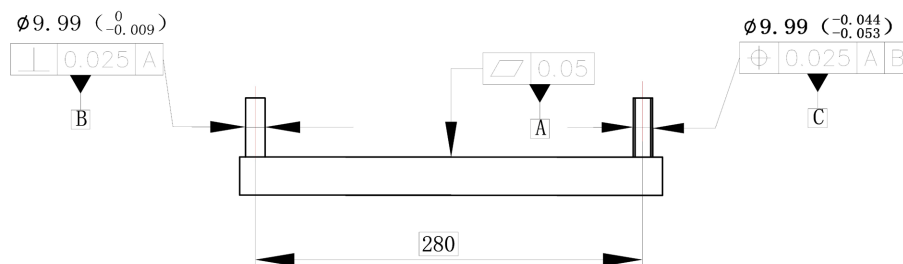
Schematic diagram of improved design for fixture positioning of bedside box cover
